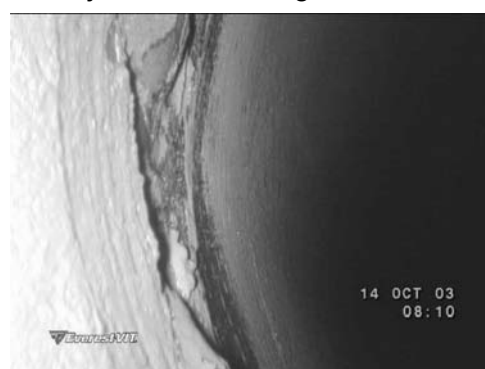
Macro section of one of the typical welded joints nozzle to header and typical end crater defects excepted after welding martensitic steel
